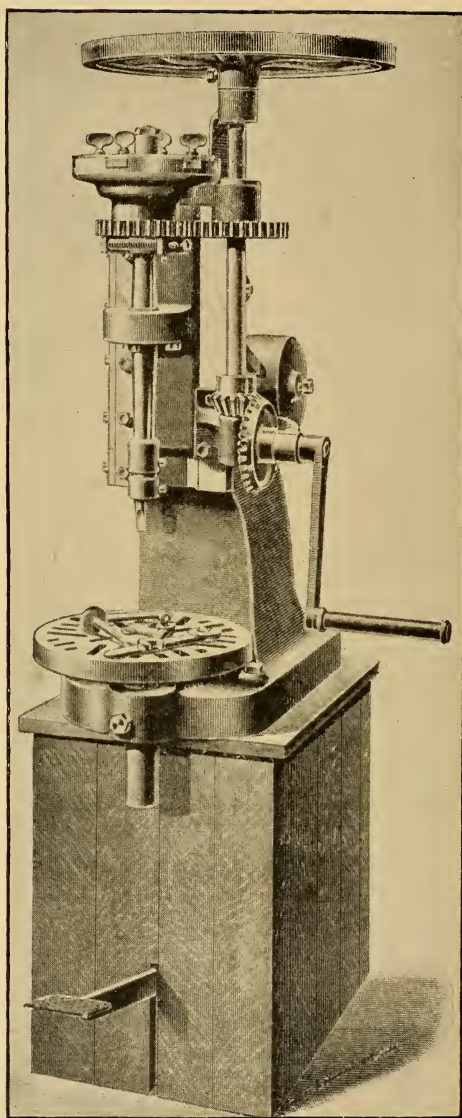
MACHINE FOR BORING SQUARE HOLES.
